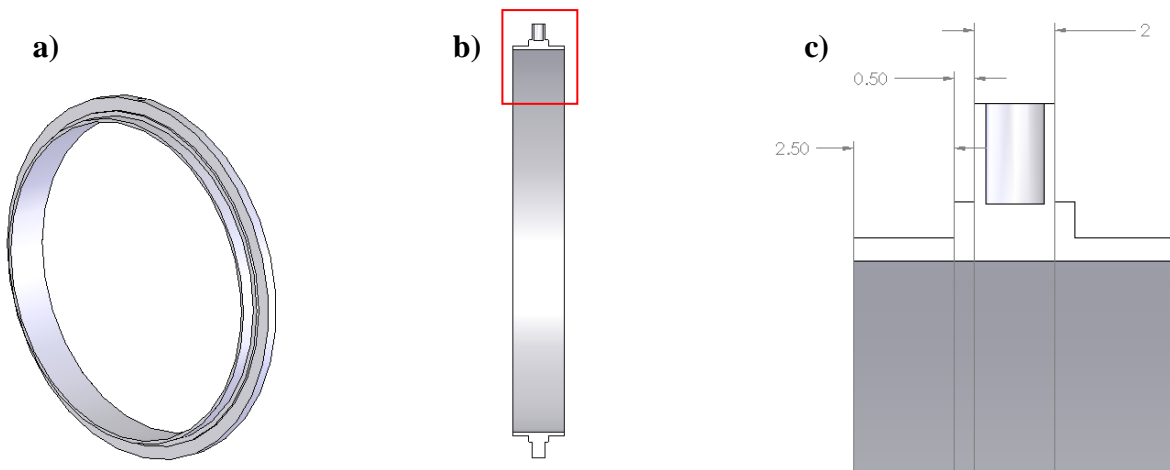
CAD drawings of an a) Alloy 46 electrode ring; b) cross section of the Alloy 46 electrode ring; and c) detailed view of the stepped face cross section highlighted by the red box in Figure 1b. Dimensions are in mm.
